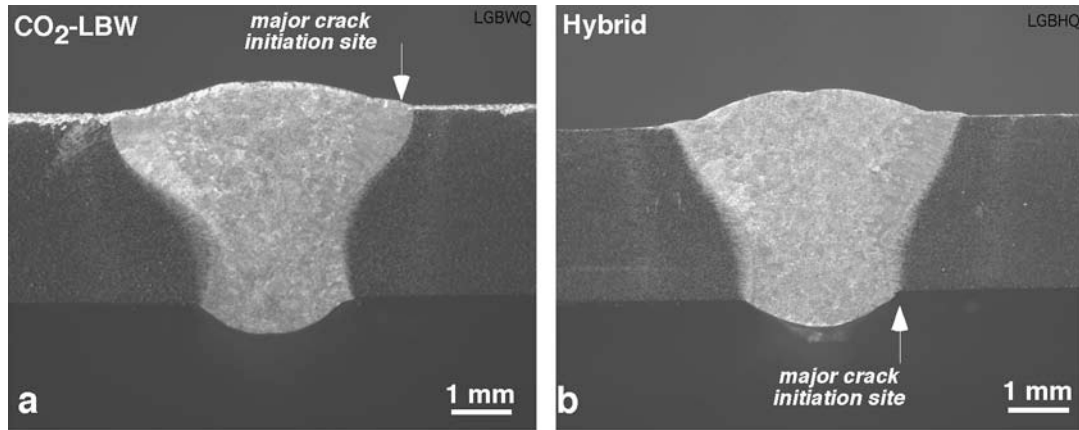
Dependence of the fatigue crack initiation site in a) CO<sub>2</sub> laser beam weld and b) hybrid weld in a 3.2 mm thick AA6013 sheet butt-welded in T6, tested at  $R = 0.1$  and  $f = 10$  Hz.
